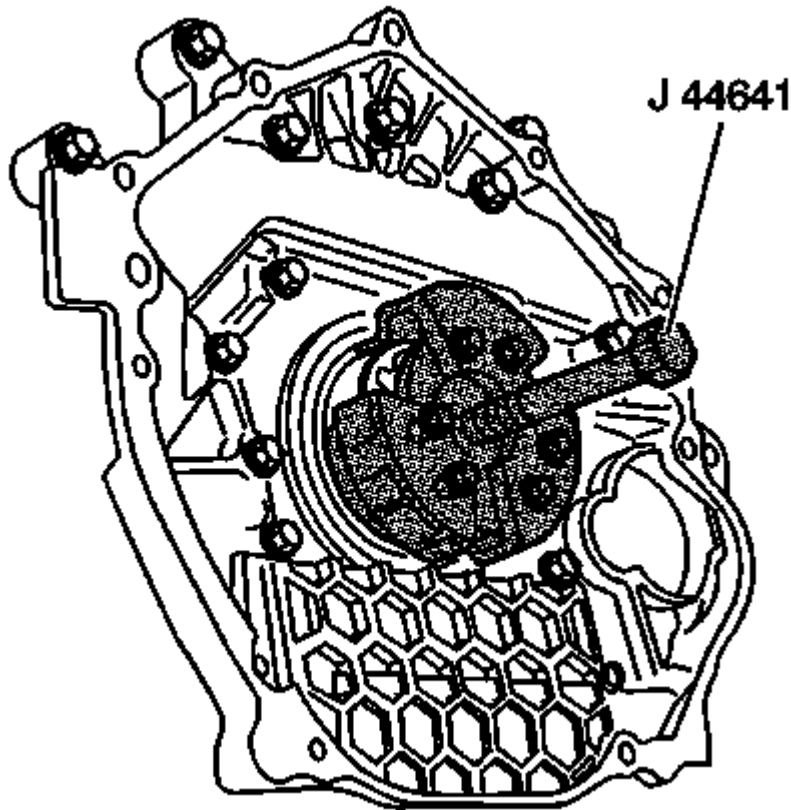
Removing Crankshaft Rear Oil Seal Using J 44641
